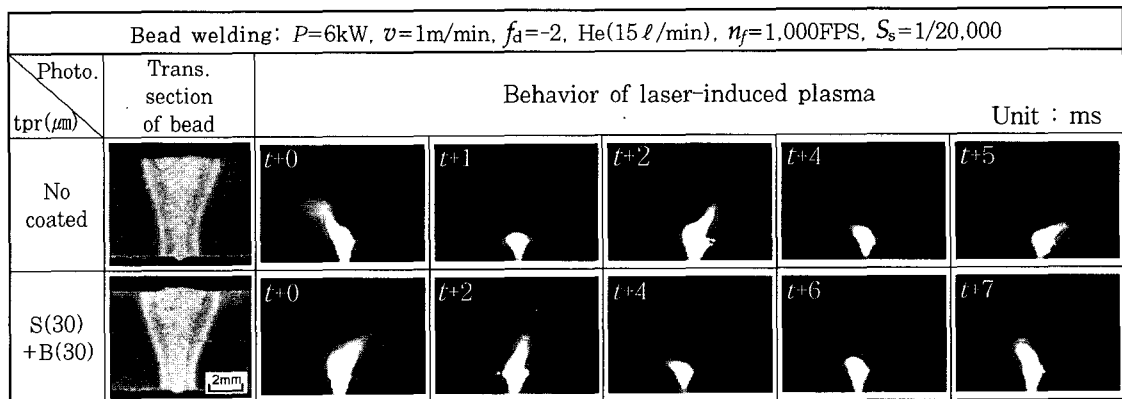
High speed photographs of laser-induced plasma and spatter in bead welding
